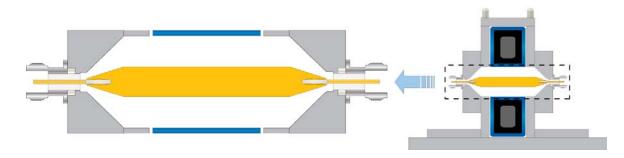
Cross-Sectional Diagram of Calibration Fixture with Probe Installed
